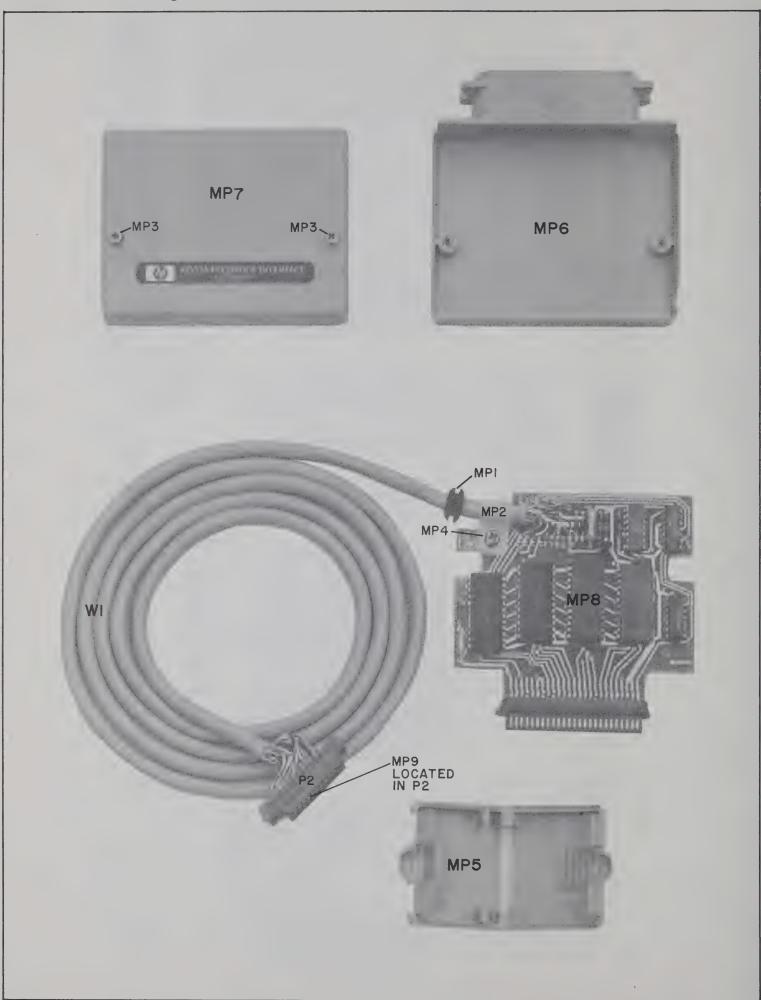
10533A Recorder Interface Mechanical Parts Location
